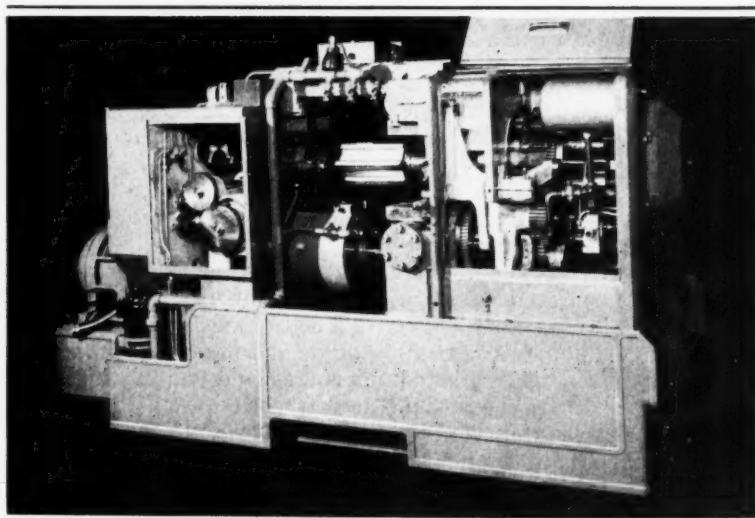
Rear View of the New Britain Model 65 Automatic Chucking Machine
